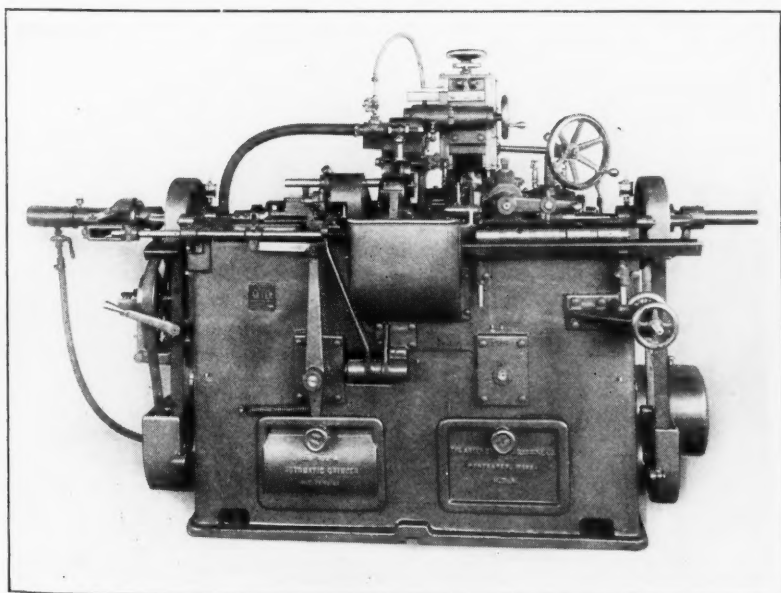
Arter Automatic Grinding Machine of the In-feed Type
